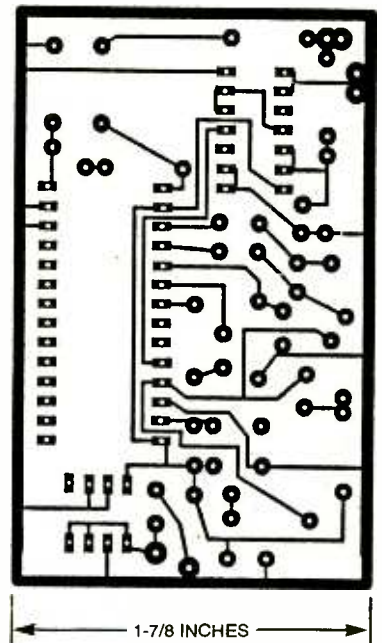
The Telephone HangUp Module was assembled on a printed-circuit board, a full-size template of which is shown here.
